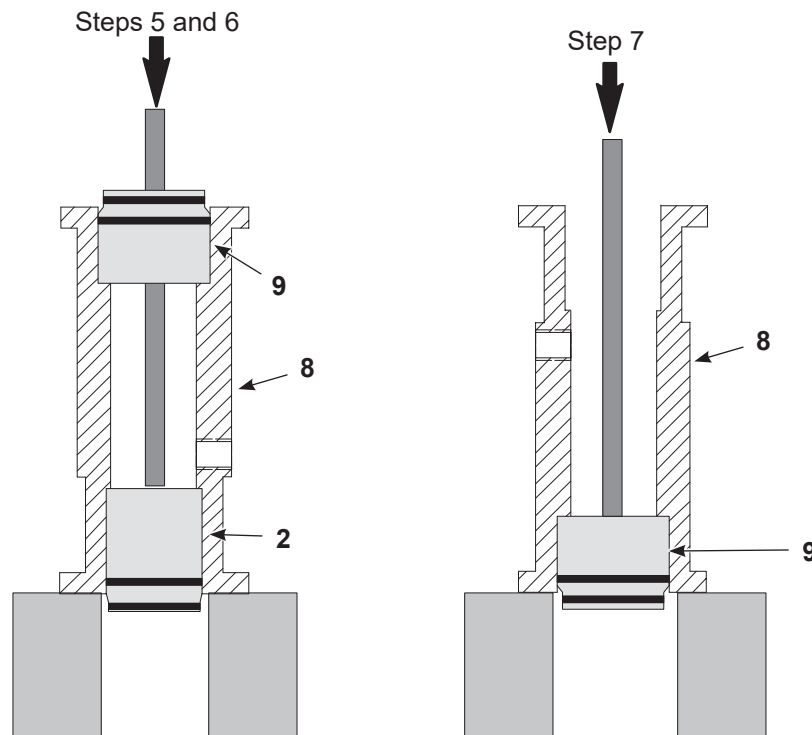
Hydraulic Section Disassembly—Steps 5, 6, and 7
